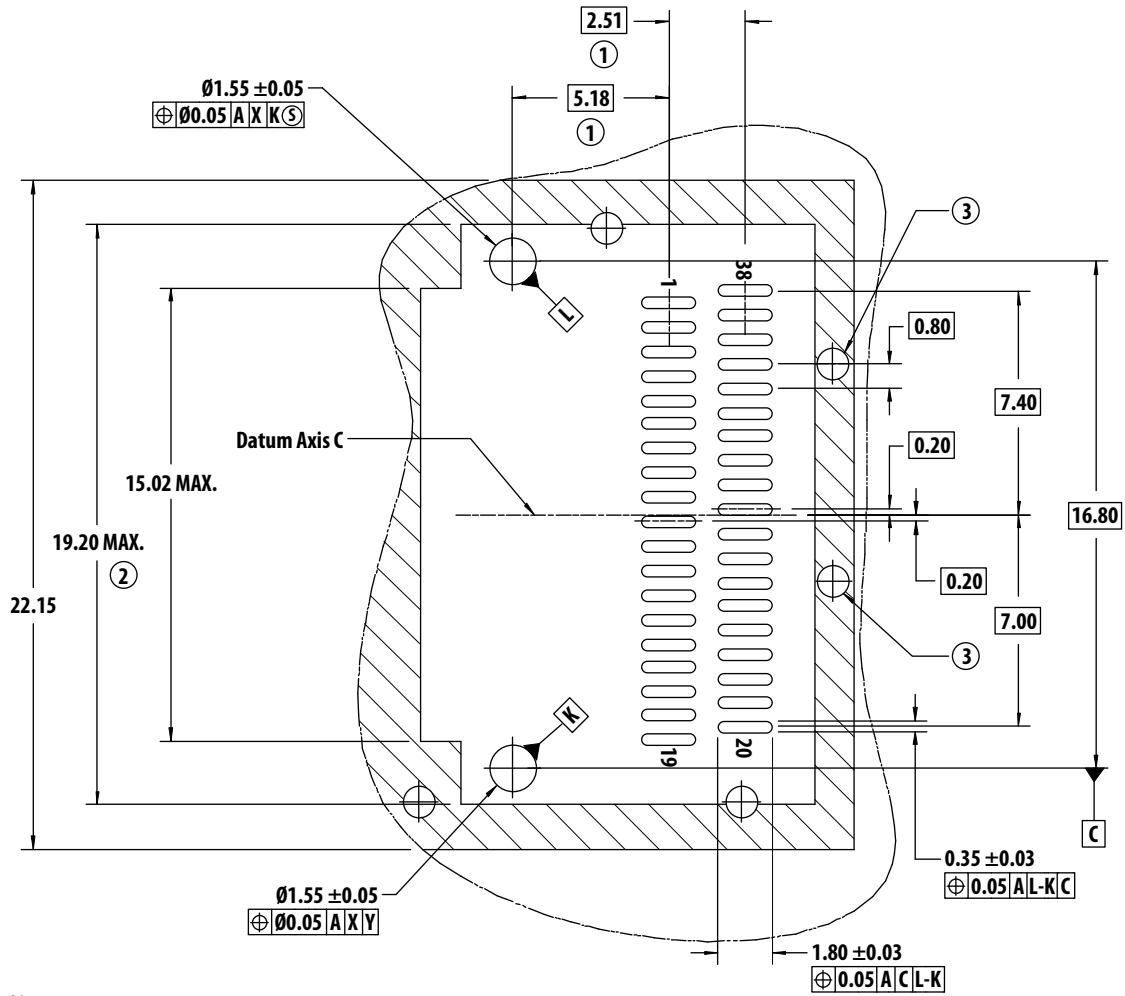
Mechanical Package Outline, Connector and Bend Radius – Dimensions in Millimeters
